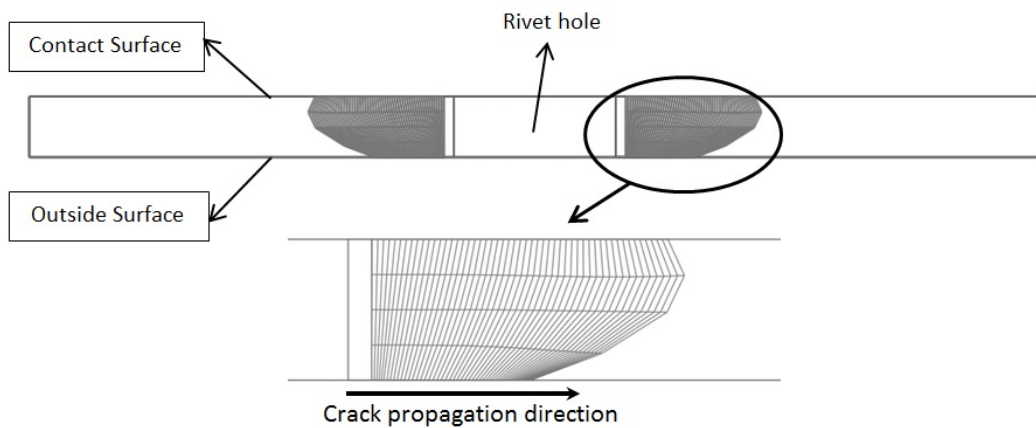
Initial symmetric through crack at the riveted hole.
